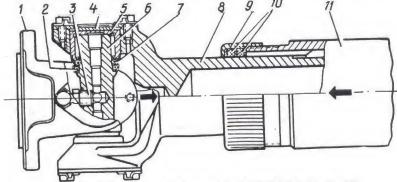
PROPELLER SHAFT WITH HERMETIC UNIVERSAL JOINTS
